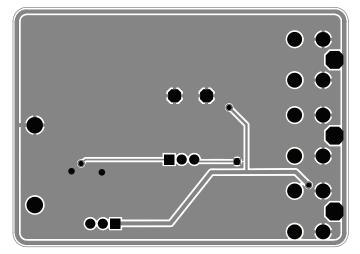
AHK3292 Evaluation Board Bottom Side Layout.
